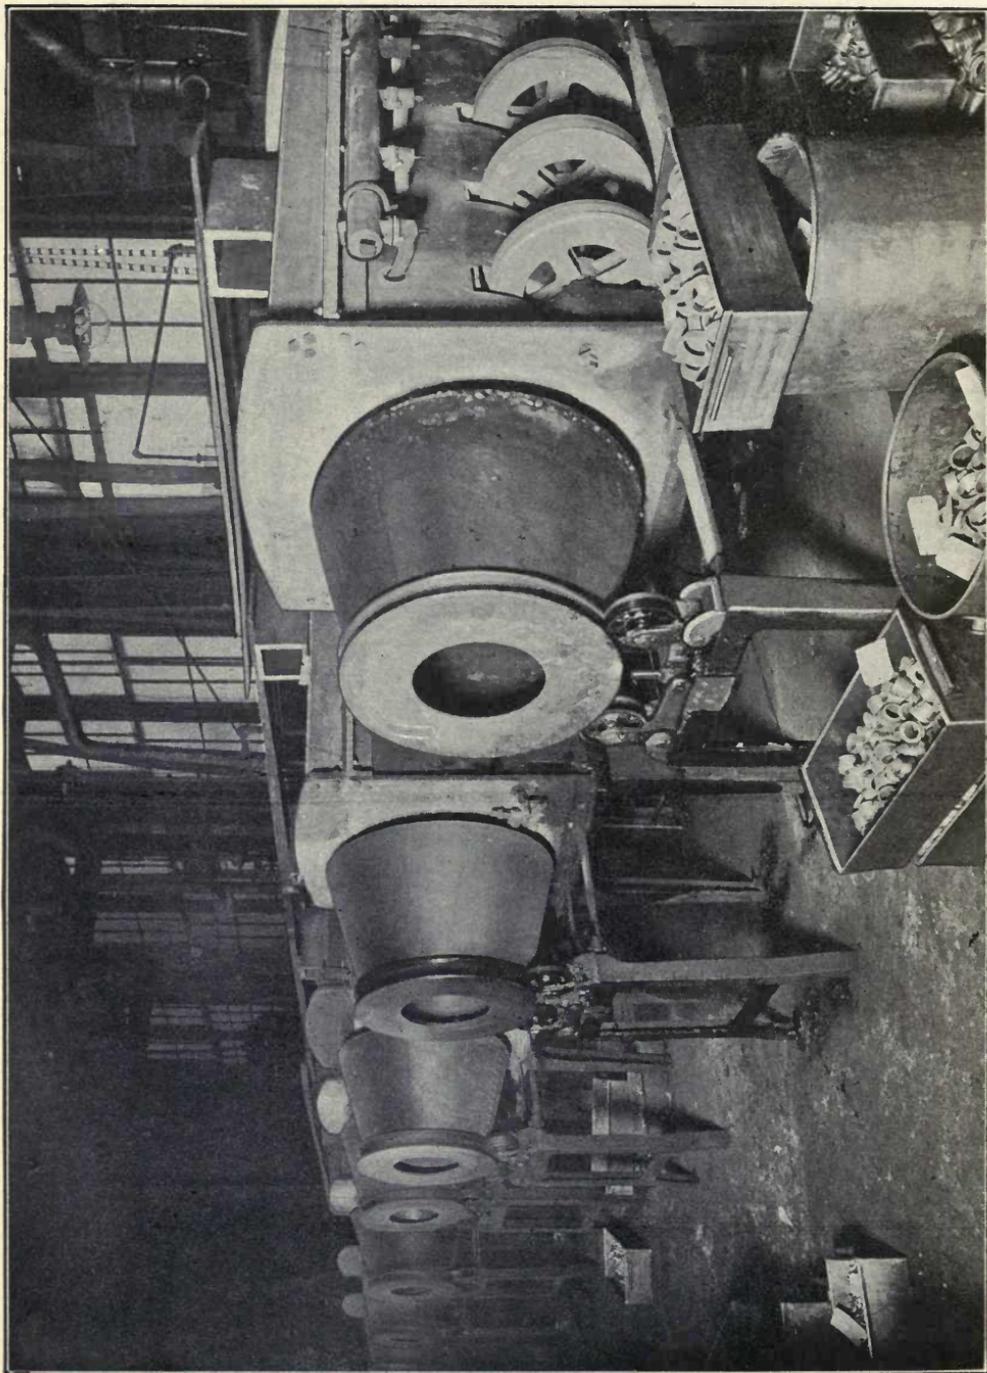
Rotary Furnaces used for drawing the Temper of Roller Bearing Parts
